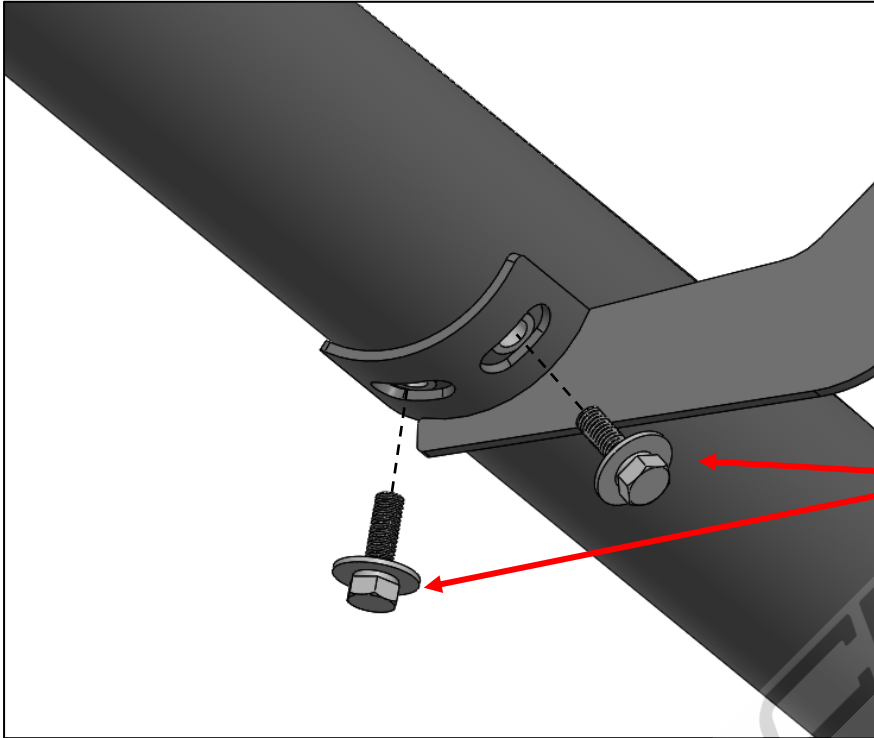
Install the Center/Rear Mounting Brackets as shown.
